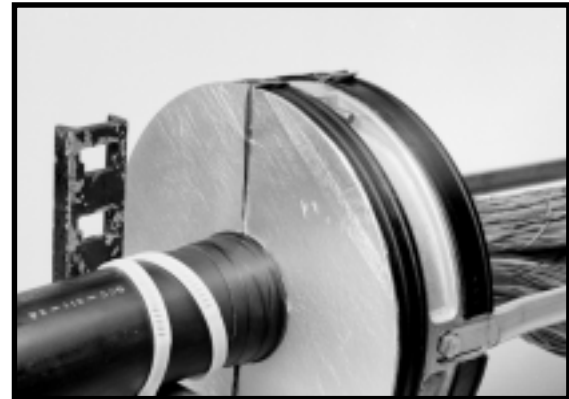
LOCK-TAPE SEALANT APPLICATION AFTER TRIMMING
